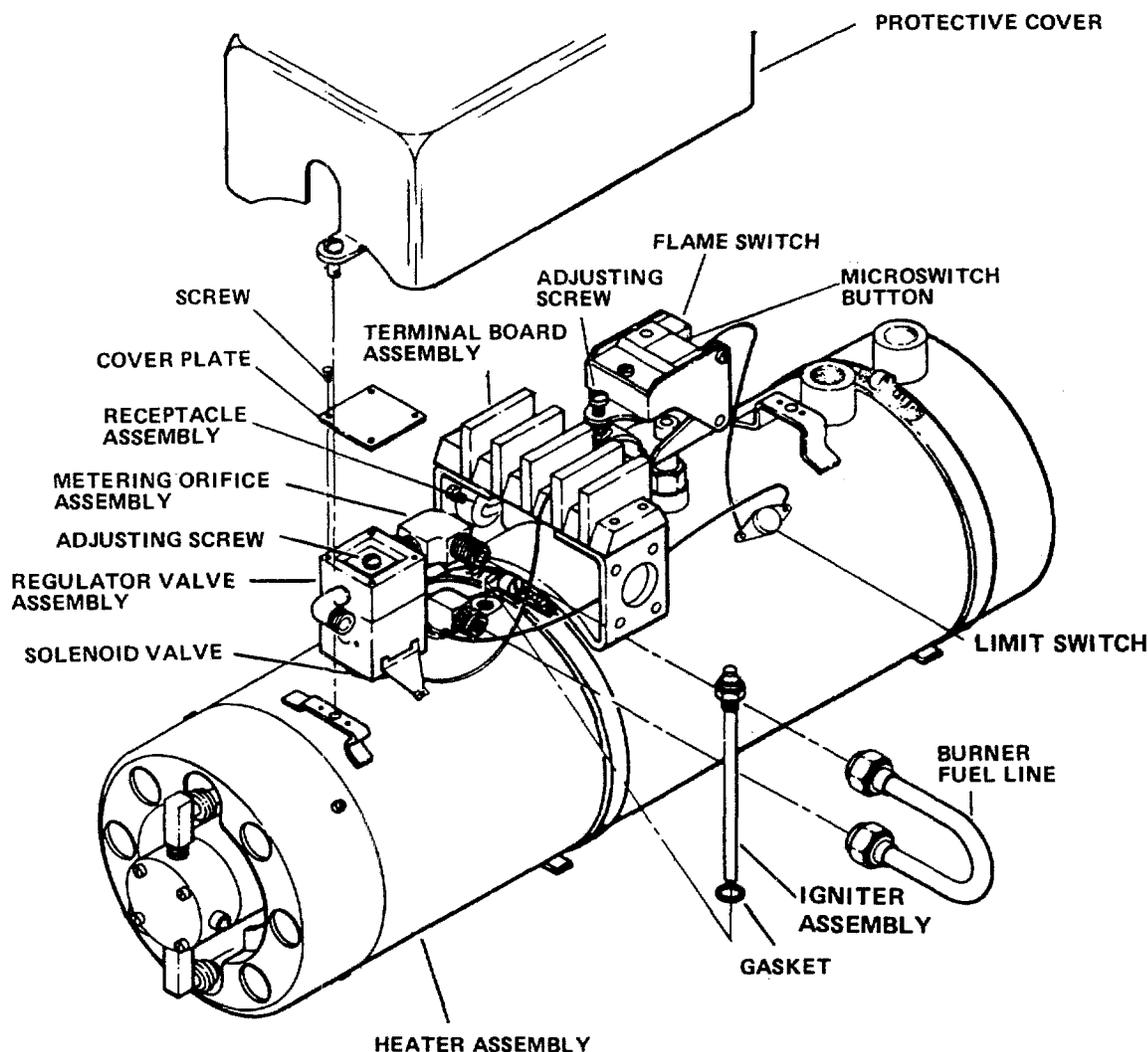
Fuel Burning Winterization Kit Heater Assembly, Maintenance
